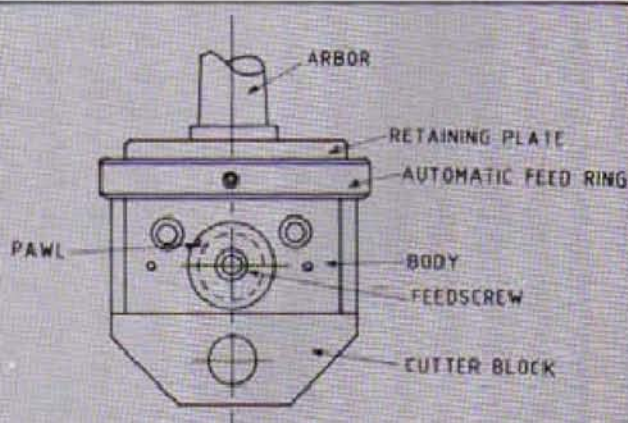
FRONT VIEW. - INDEX RING REMOVED
